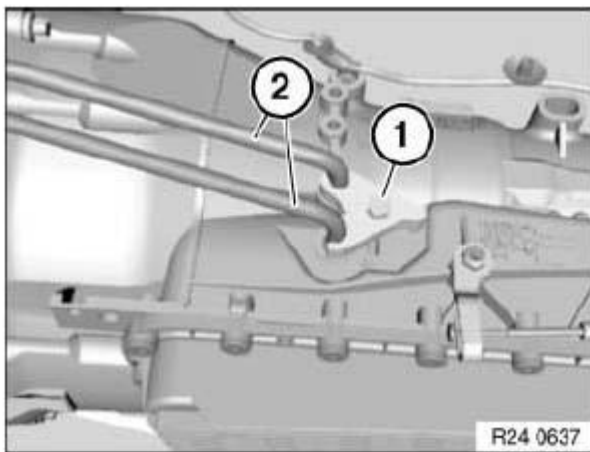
Identifying Hydraulic Lines To Transmission Fluid Cooler
